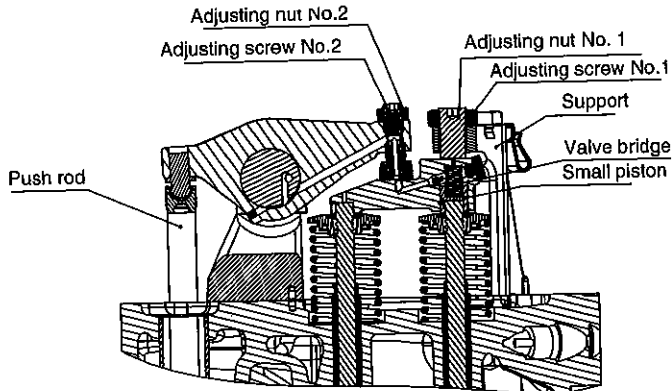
14 Adjustment of outlet valve and EVB clearances
